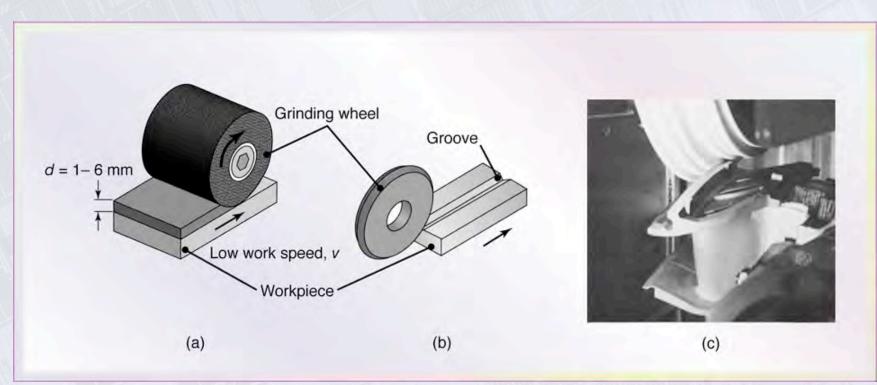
(a) Schematic illustration of the creep-feed grinding process. Note the large wheel depth-of-cut, *d*. (b) A shaped groove produced on a flat surface by creep-grinding in one pass. Groove depth is typically on the order of a few mm. (c) An example of creep-feed grinding with a shaped wheel. This operation also can be performed by some of the processes described in Chapter 27. *Source:* Courtesy of Blohm, Inc.
